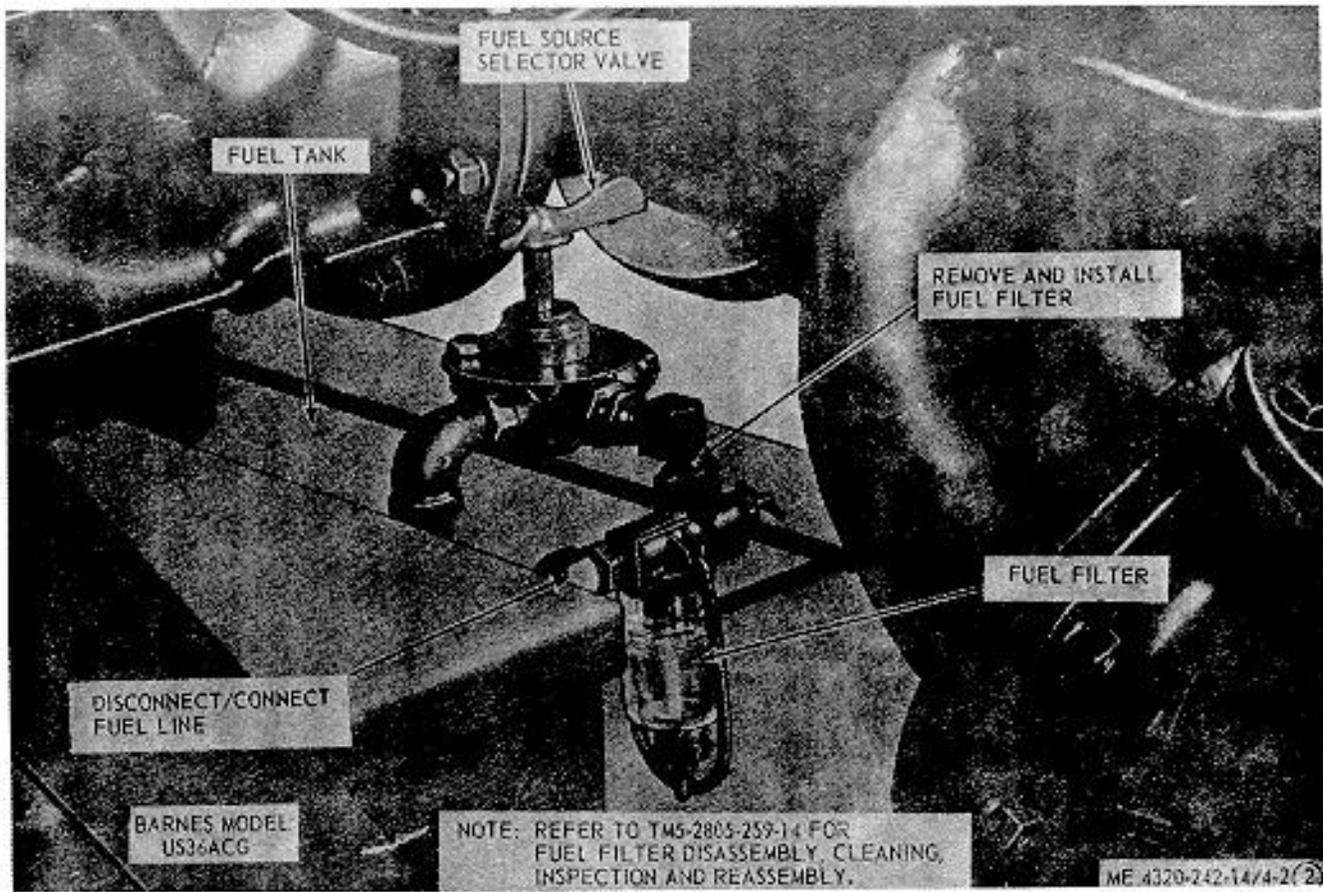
Fuel filter, removal and installation Model US36ACG. (Sheet 2 of 2).
